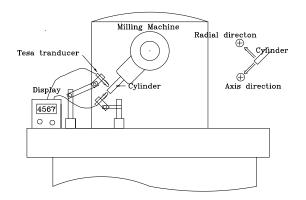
Setting of equipment on the knee type milling machine with tilted spindle
